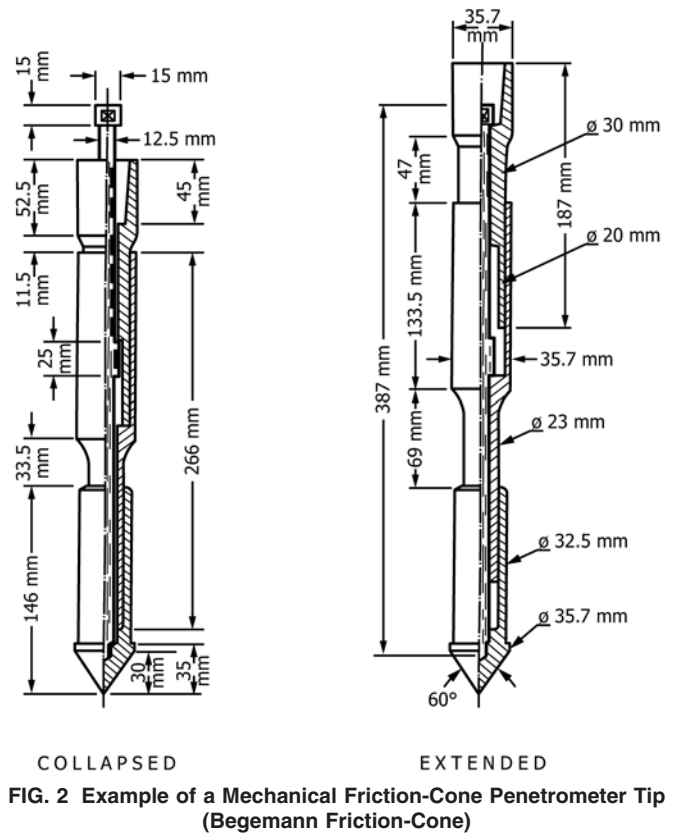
Example of a Mechanical Friction-Cone Penetrometer Tip (Begemann Friction-Cone)
